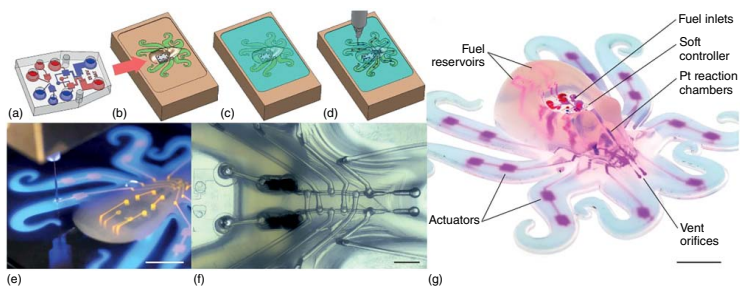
Soft robot assembly printed by DIW technology. (a–f) Fabrication steps of the assembly, including loading a prefabricated microfluidic soft controller into a mold and printing hydrogel inks. (g) The fabricate robot is removed from the mold and inverted to reveal a fully soft, autonomous robot. Source: Wehner et al. 2016 [116]. Reproduced with permission of Springer Nature.
